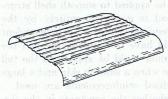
Sheet-Metal Beams and TENSION-FIELD-TYPE BEAMS SE-CURELY BRACED AGAINST SHEAR AND COMPRESSION AND UNDER A LOAD OF COMPRESSION FORCES ACT-ING IN DIRECTION OF THE SPARS
